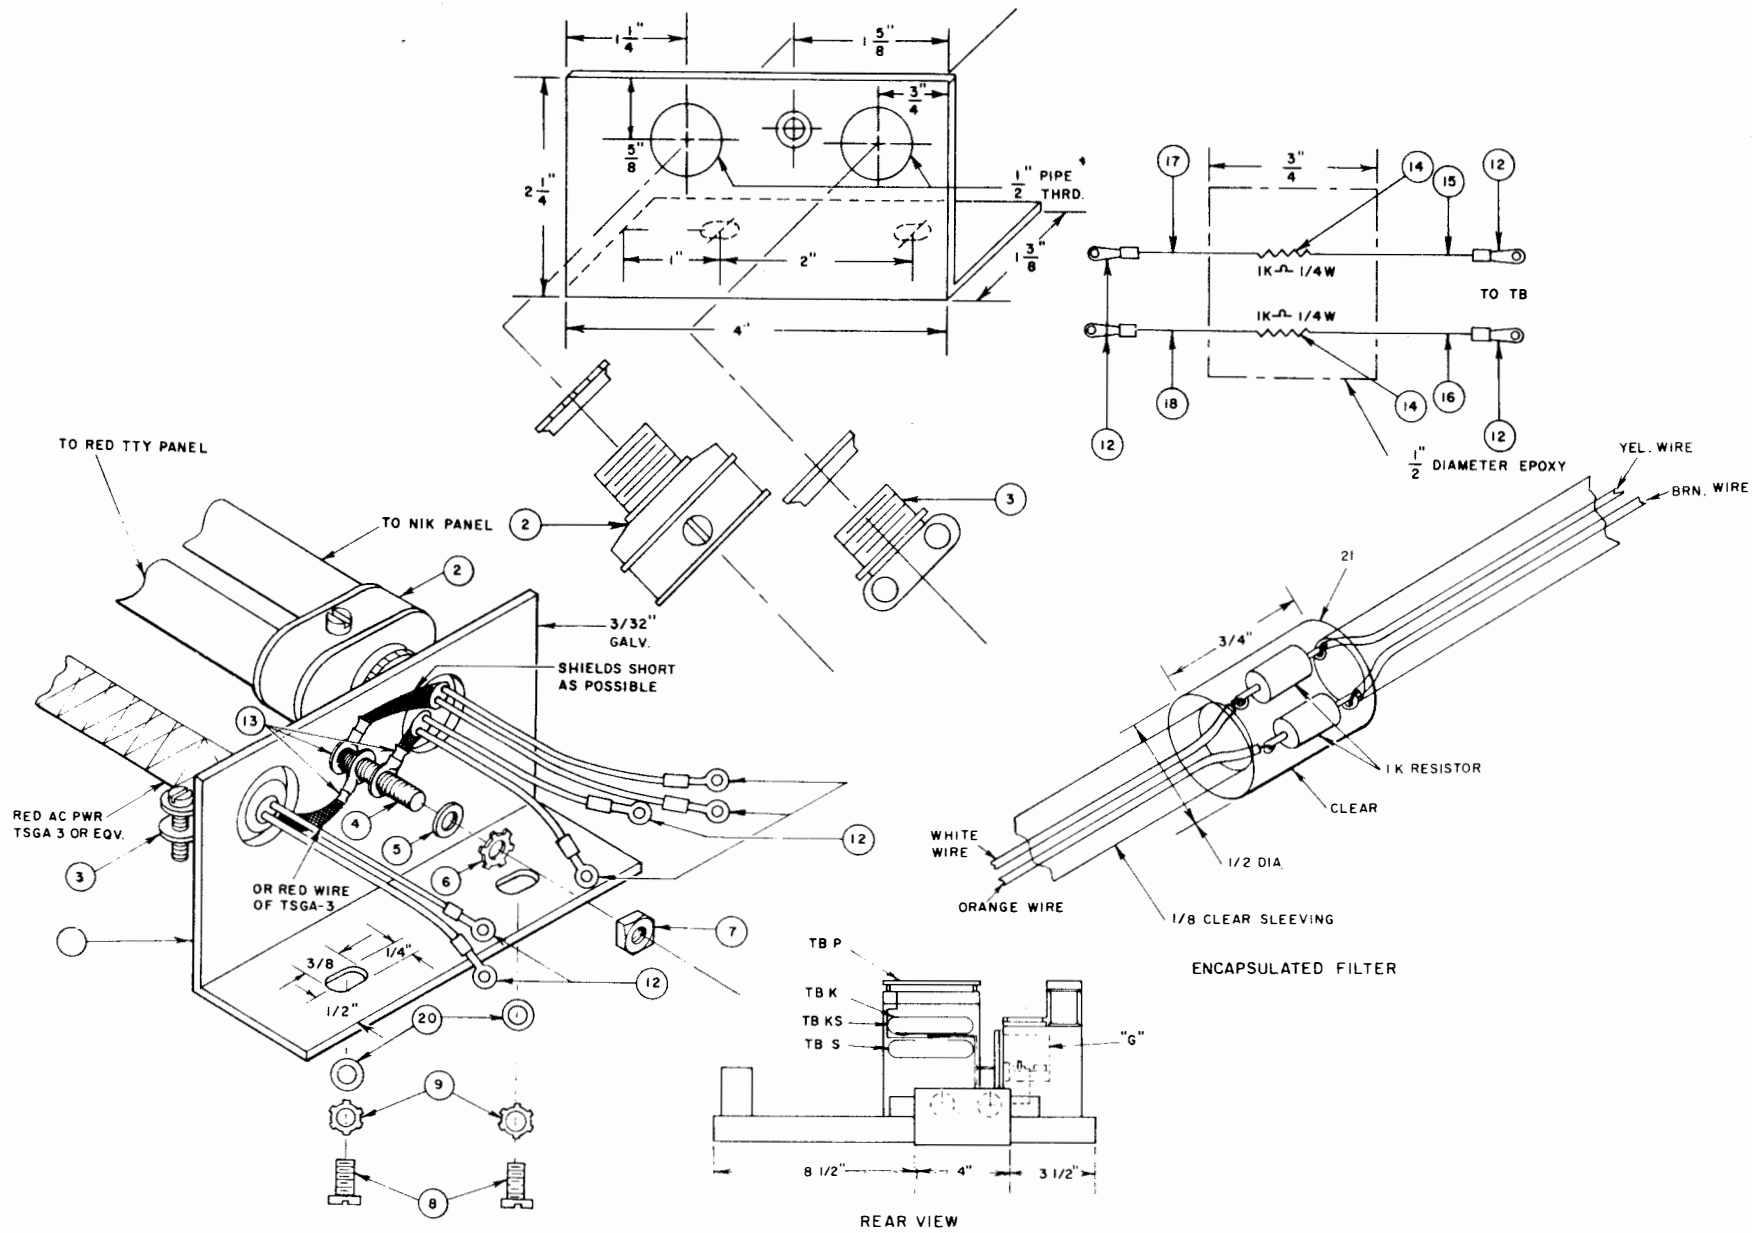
AN/UGC-20 Installation Drawing (Part 2)
